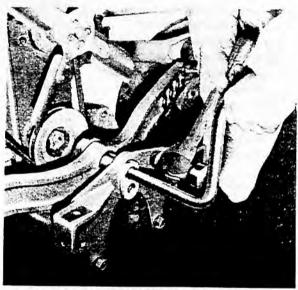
REMOVING CENTRE AXLE PIVOT PIN
